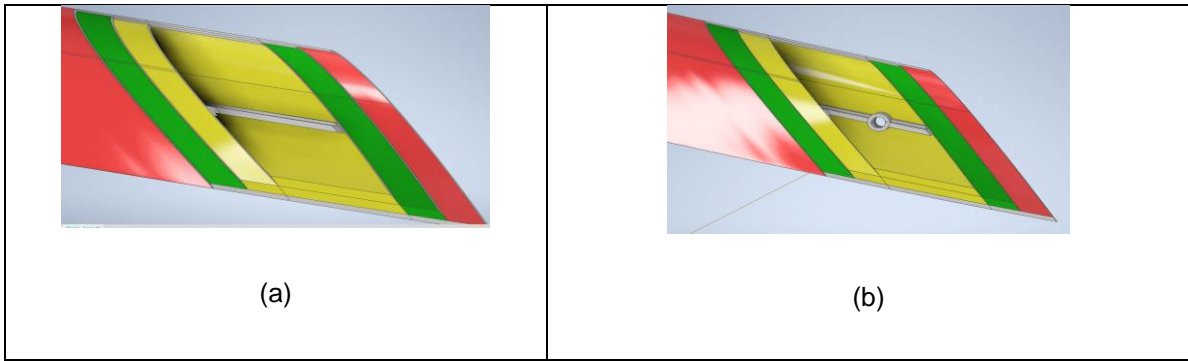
(a) Closeup view of Z-section with step joints, (b): Blade with Z-section and hole support
